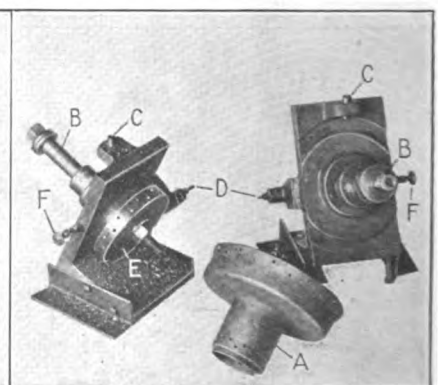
HUB SPOKE HOLE DRILLING FIXTURES
